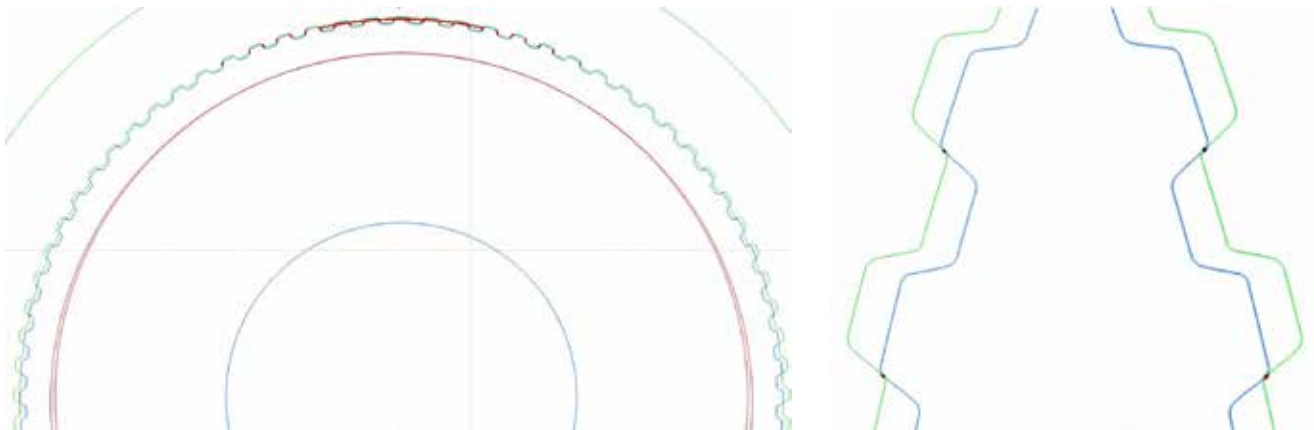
Meshing gear and planet (left) details showing collisions (right).
